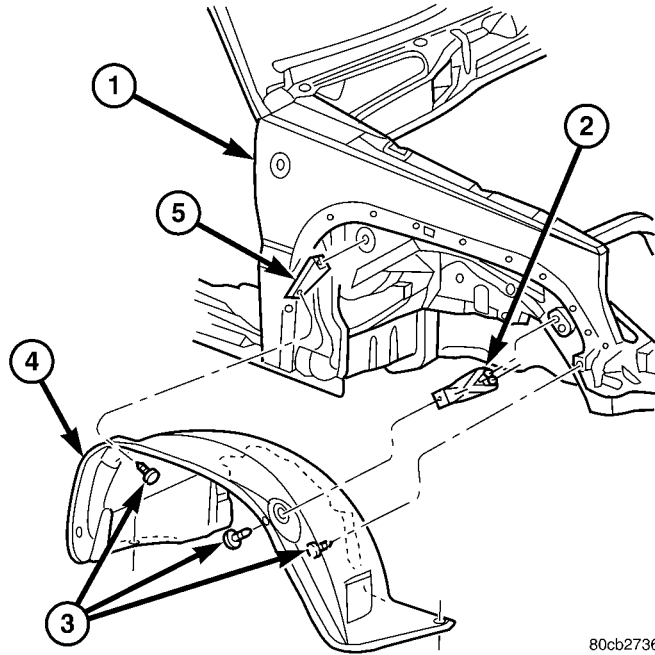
FRONT WHEELHOUSE SPLASH SHIELD
